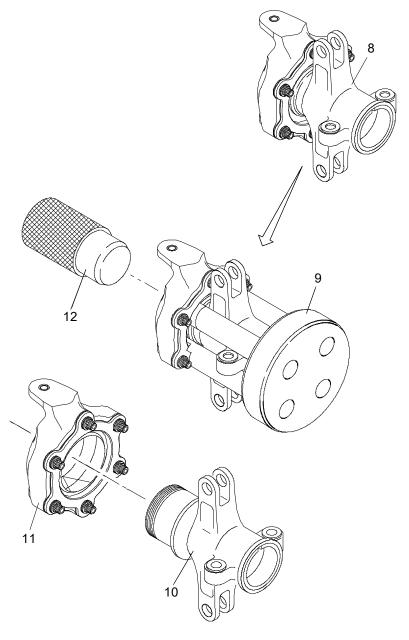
(sheet 1 of 4). Housing and slider group - Disassemble procedure (Sleeve assy P/N 109G6430A03)
